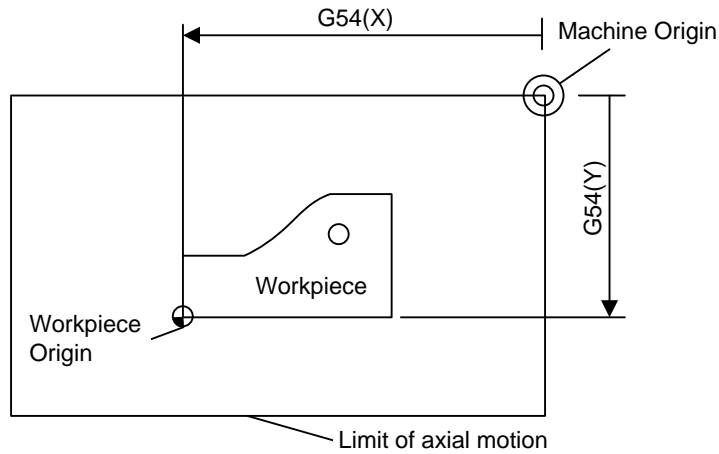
The relationship between workpiece offset and machine coordinate system
